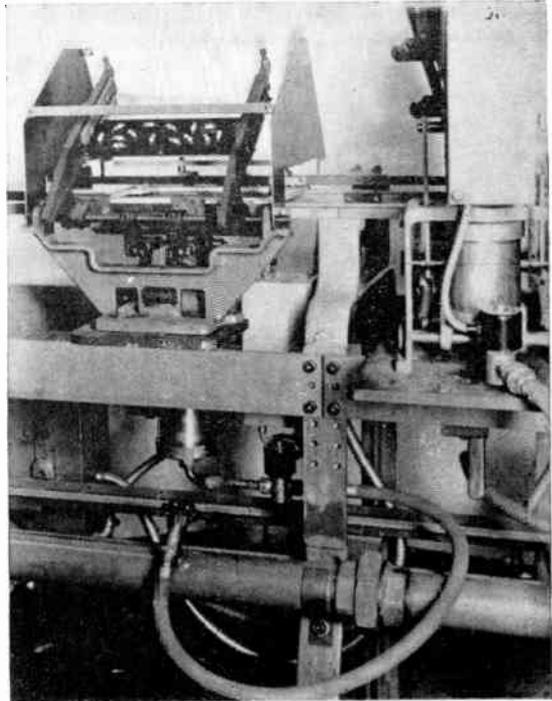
The Board Unloading Machine, which removes the printed wiring boards from the Pallets on completion of the assembly operation.
